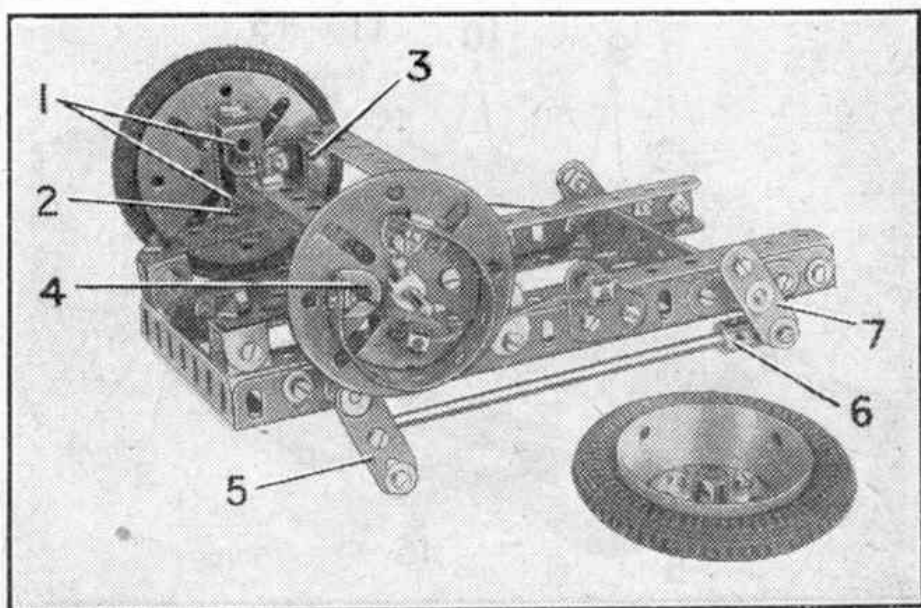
The front axle unit with one of the wheels removed to reveal the details of the brake mechanism.
